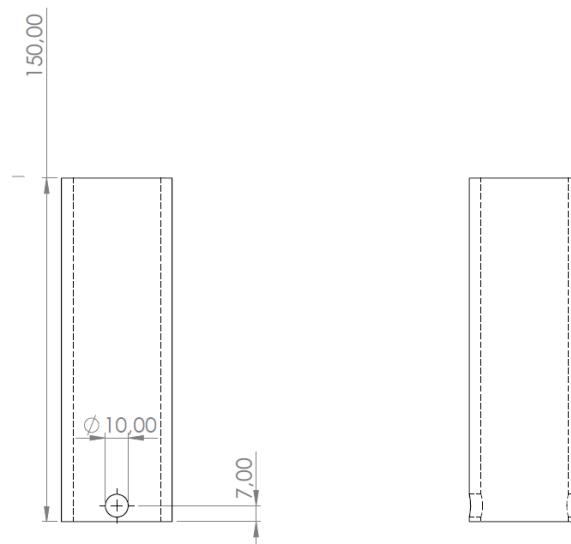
Technical drawing in mm's of the reservoir cylinder.
